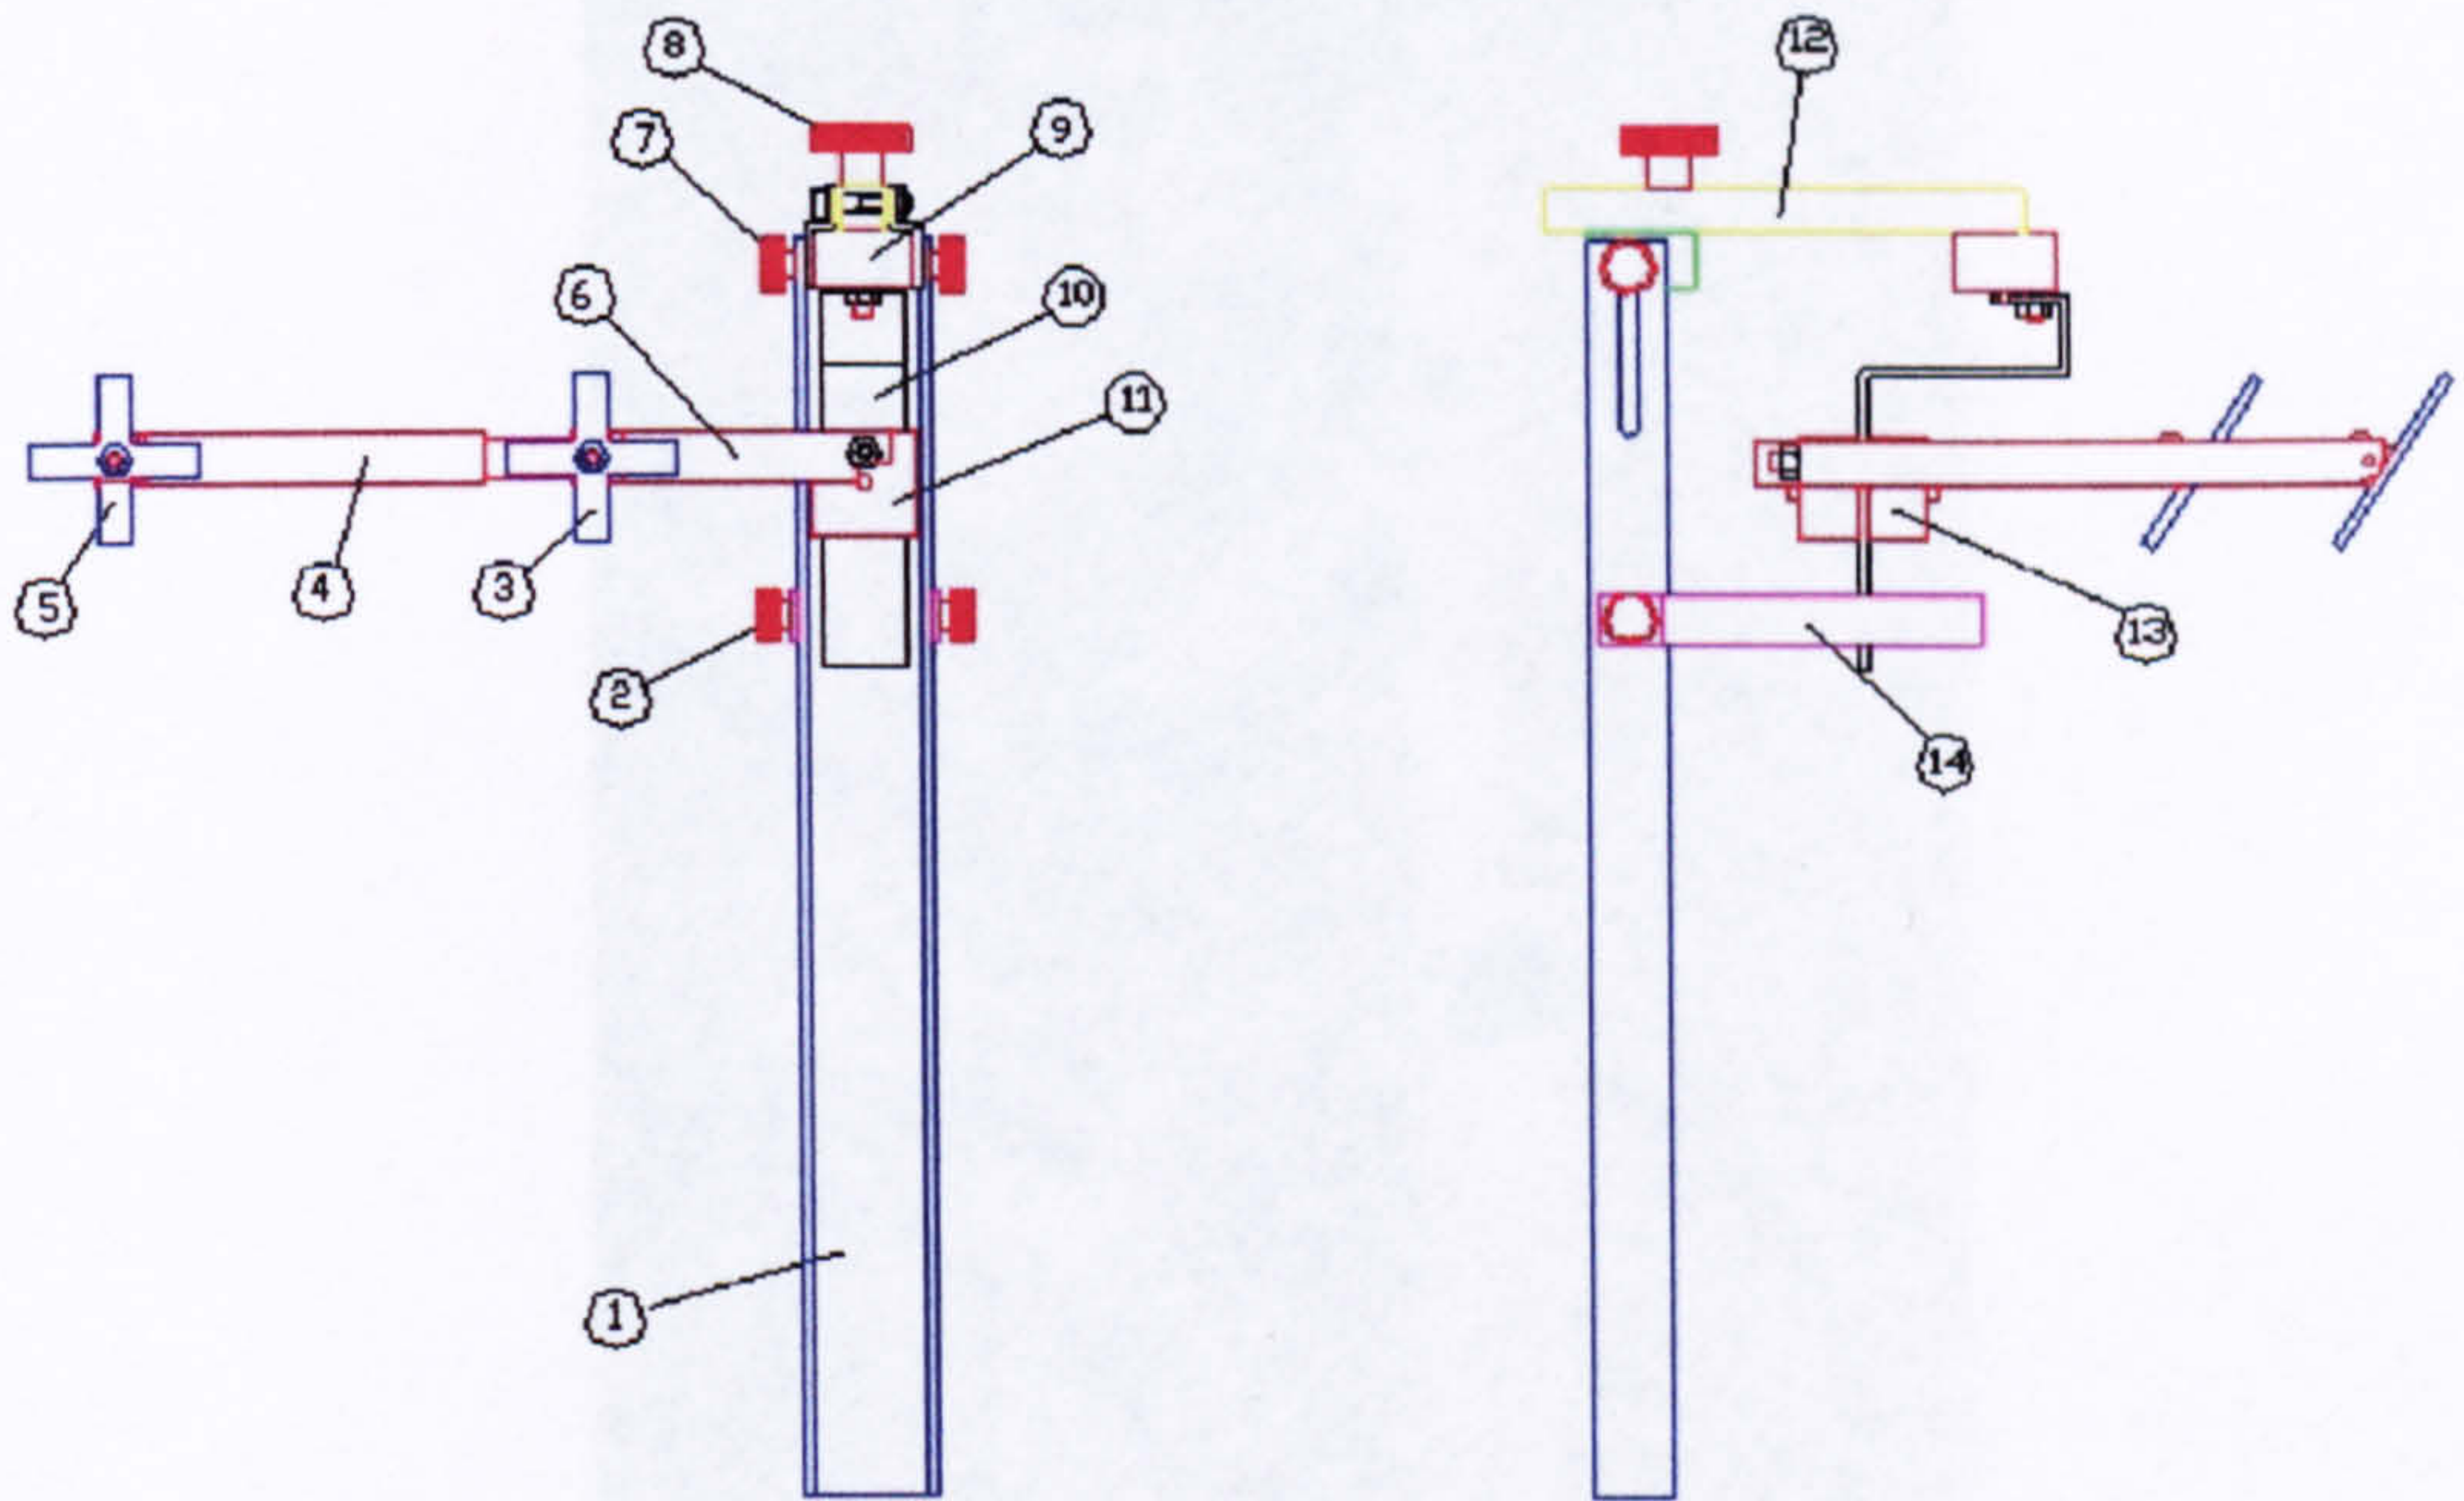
Assembly drawing of the sterno-clavicular movement detector
